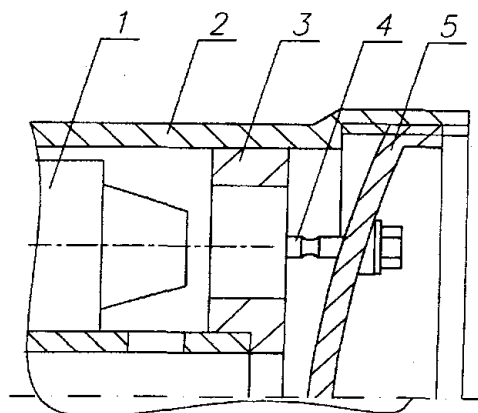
Fragment of the tail compartment of separation with a forcing unit in the form of explosive bolts with weakened sections - necks: 1 - CE, 2 - case of the HP, 3 - cassette, 4 - explosive bolt, 5 - the bottom
